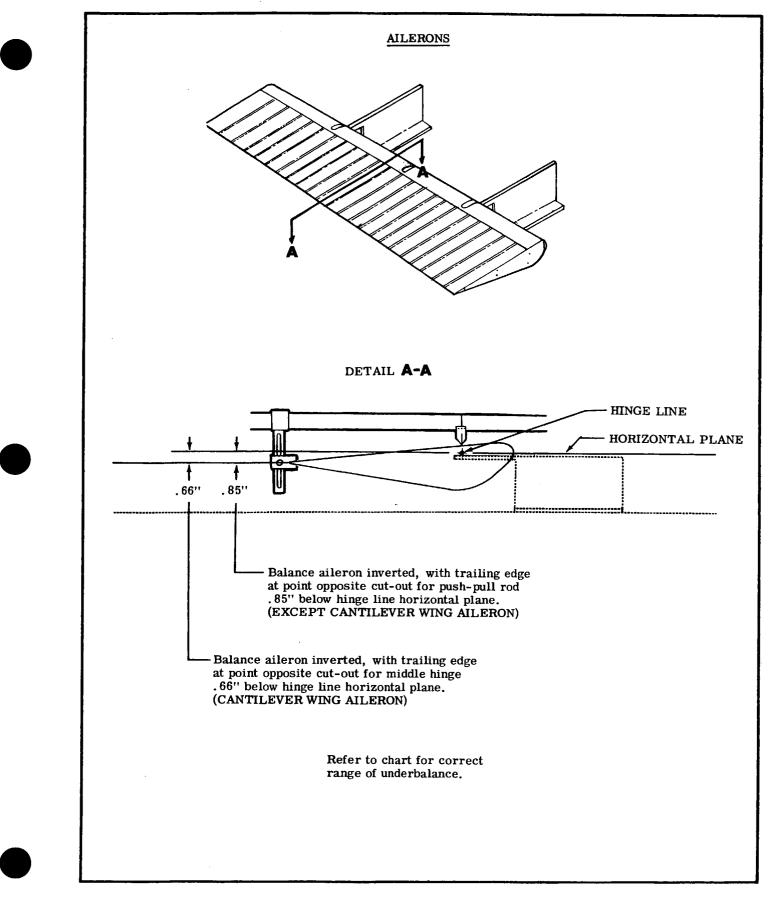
Control Surface Balancing (Sheet 2 of 4)
